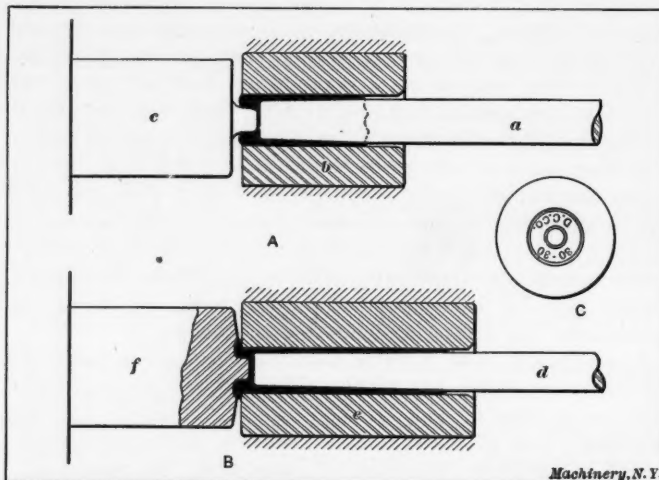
Illustration showing how the Cup is inserted and the Shell headed
